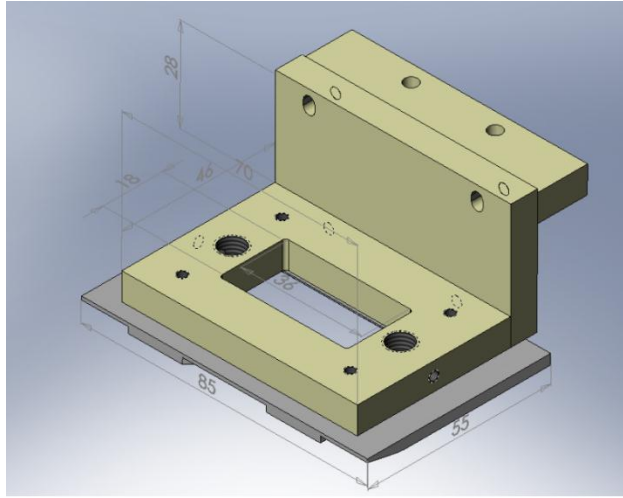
Technical drawings of the sample cell holder assembly (all dimensions are in mm).
